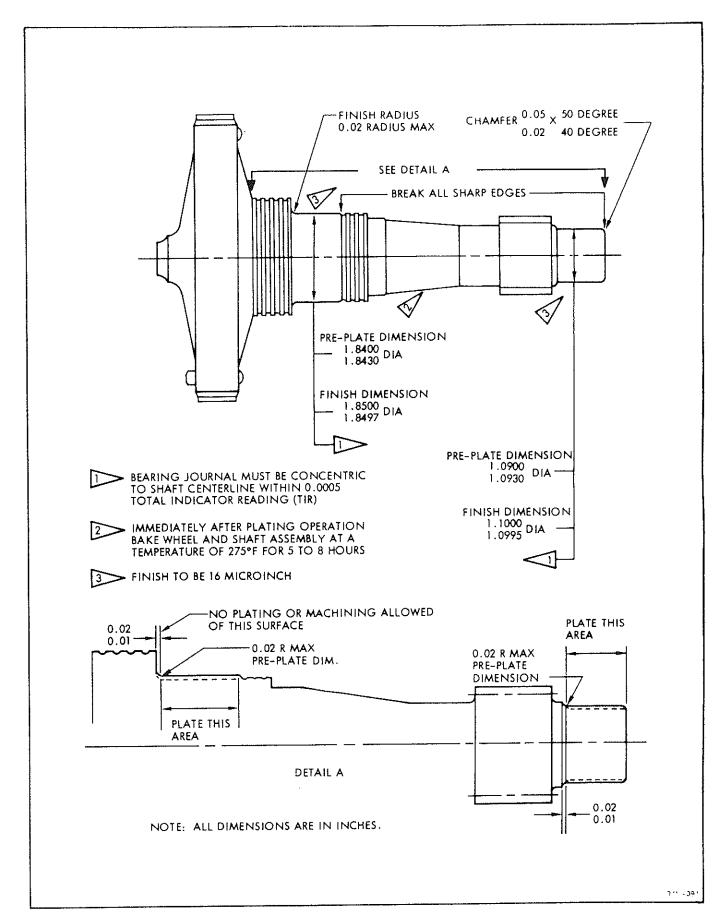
Output Turbine Shaft Hard Chrome Plating
